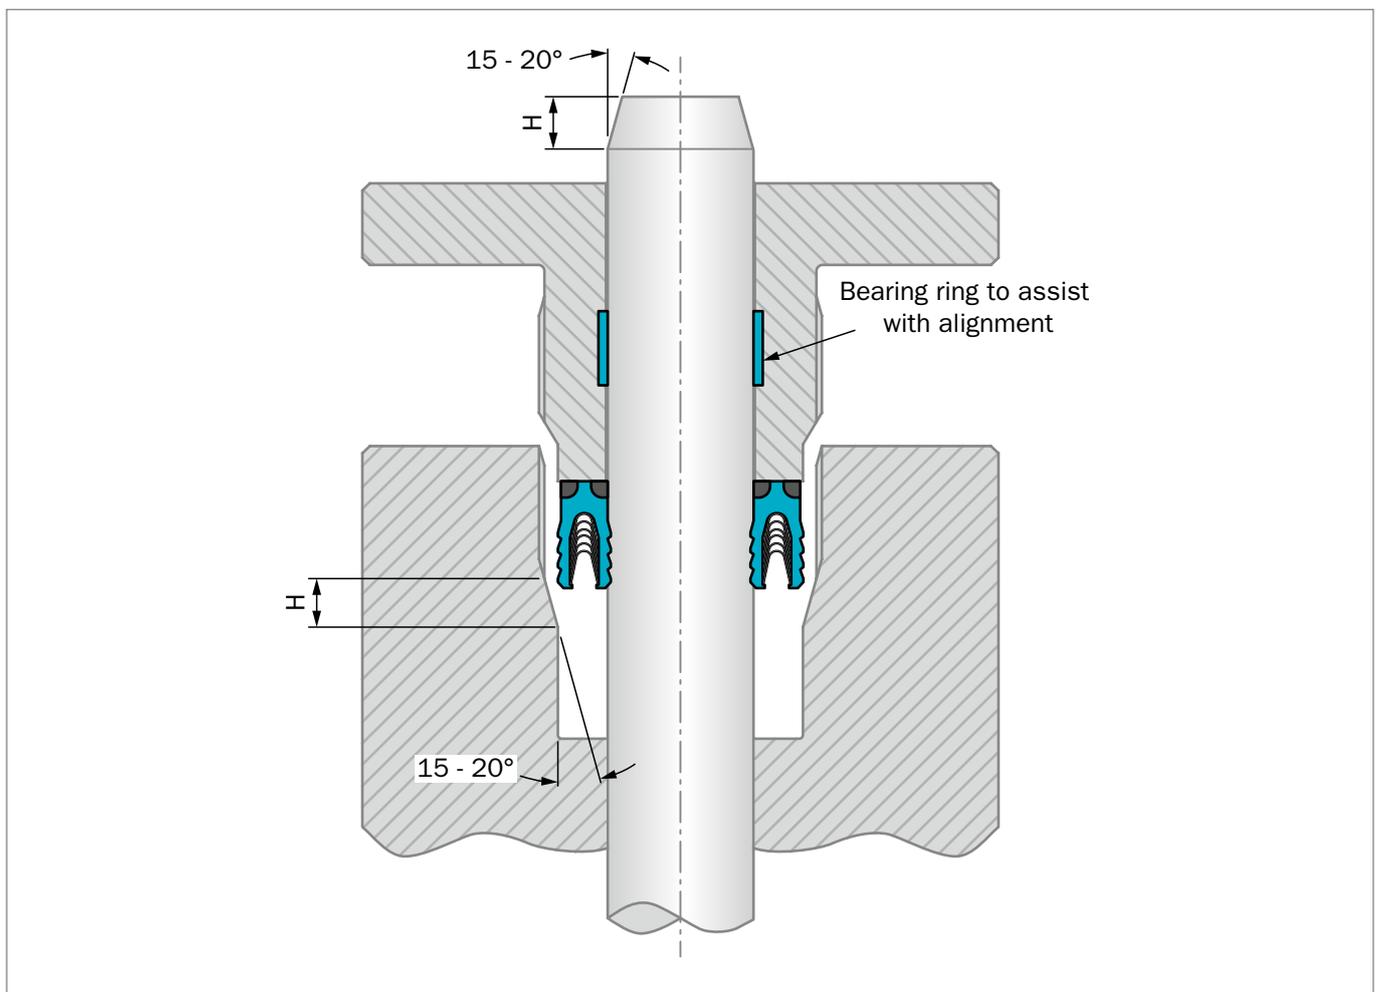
Turcon® Variseal® MC installation arrangement, detailed as valve stem.
